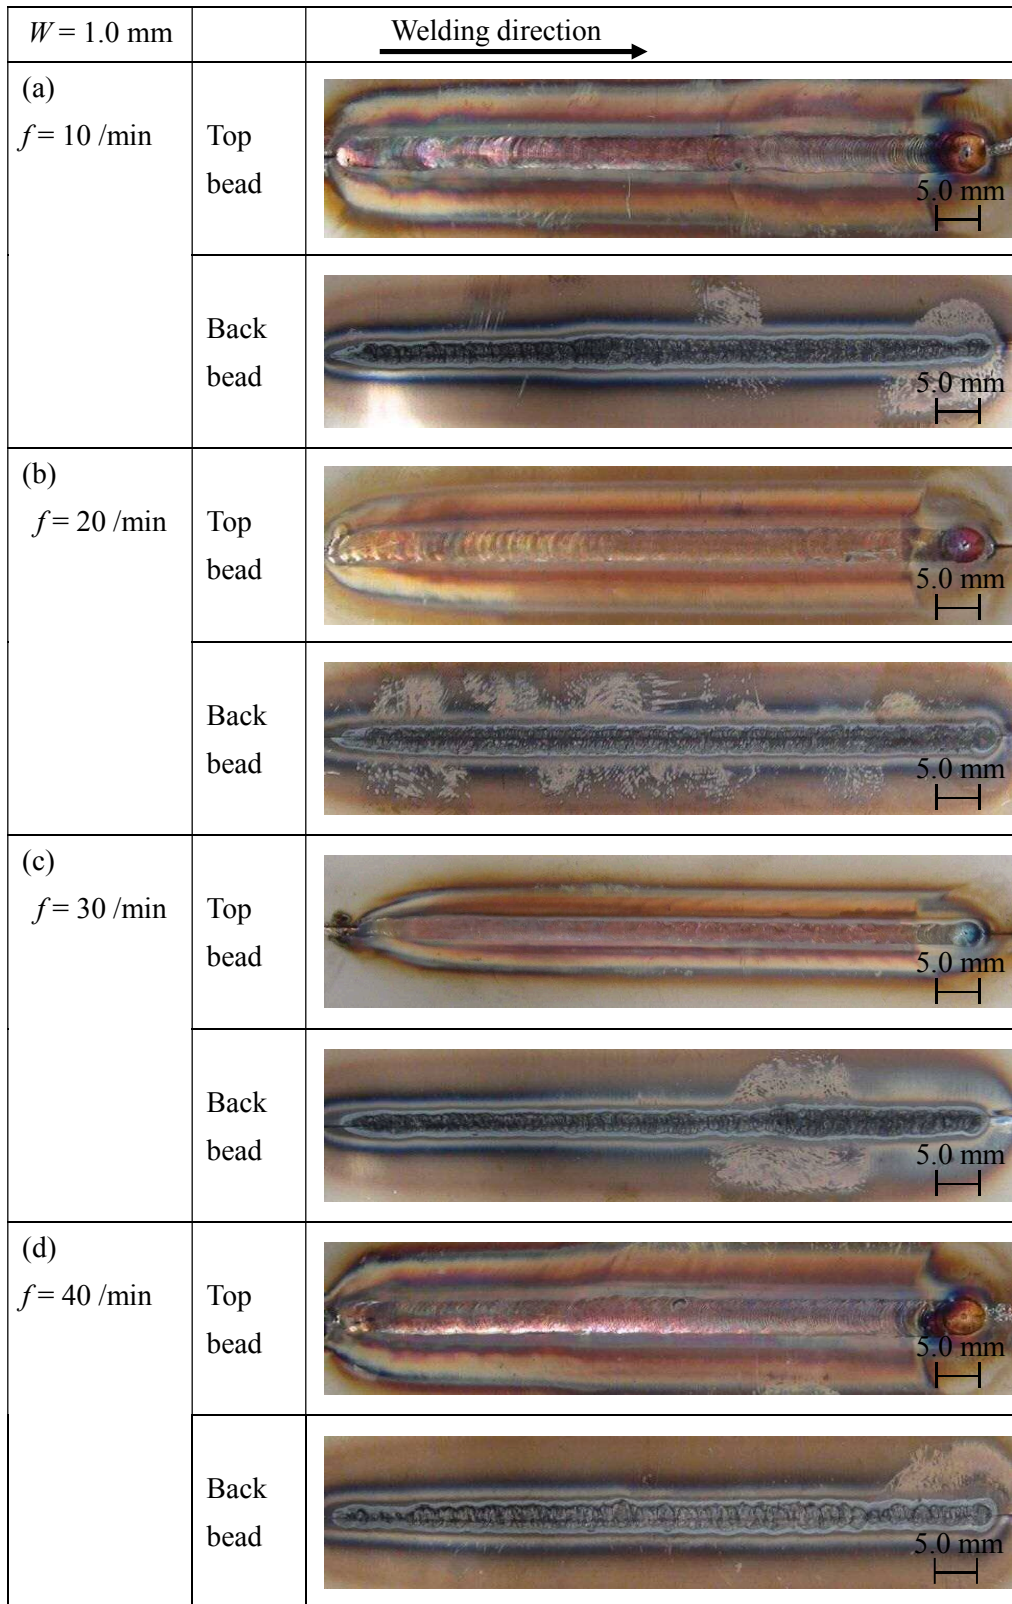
Appearance of hybrid welding beads using laser weaving ($W = 1.0 \text{ mm}$)
